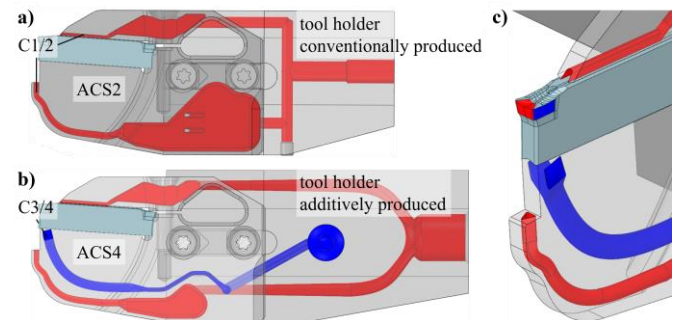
a) ACS2 Tool setup with conventionally produced tool holder, b) ACS4 tool setup with additively produced tool holder c) Sketch of cooled tool insert zones
